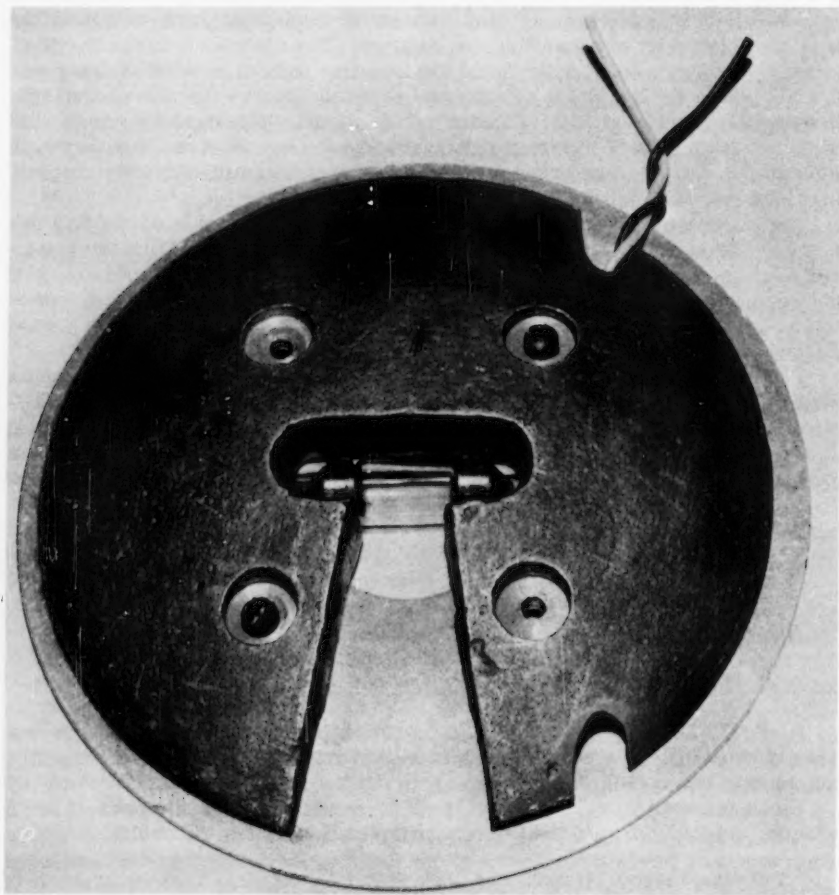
FINCH'S PROTOTYPE FIXTURE
